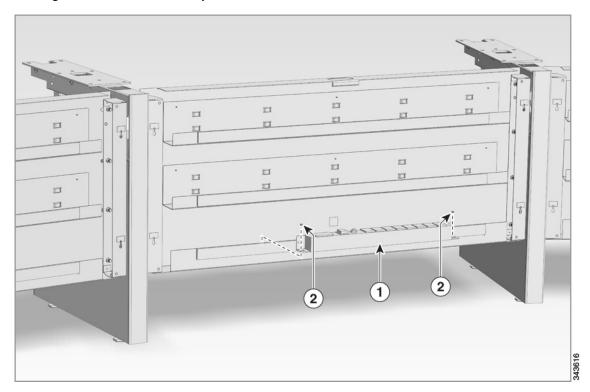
Installing the Power/Ethernet Outlets to the Outside Table Legs
